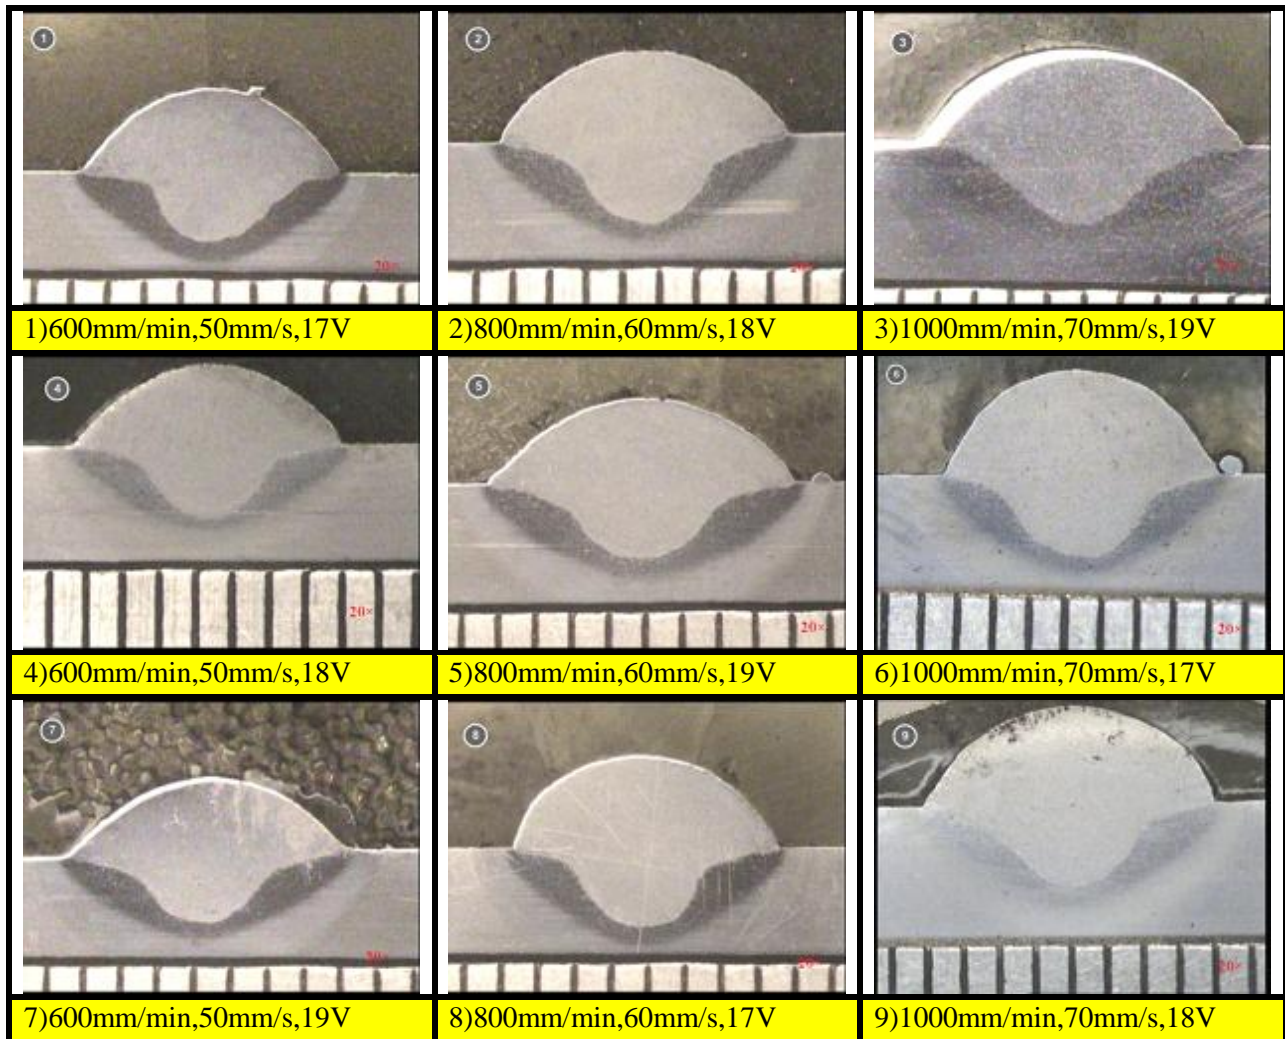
Macroscopic images of the weld bead cross section
